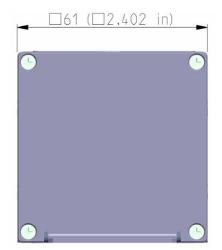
RT6201 front view, dimensions in mm and (inches)
